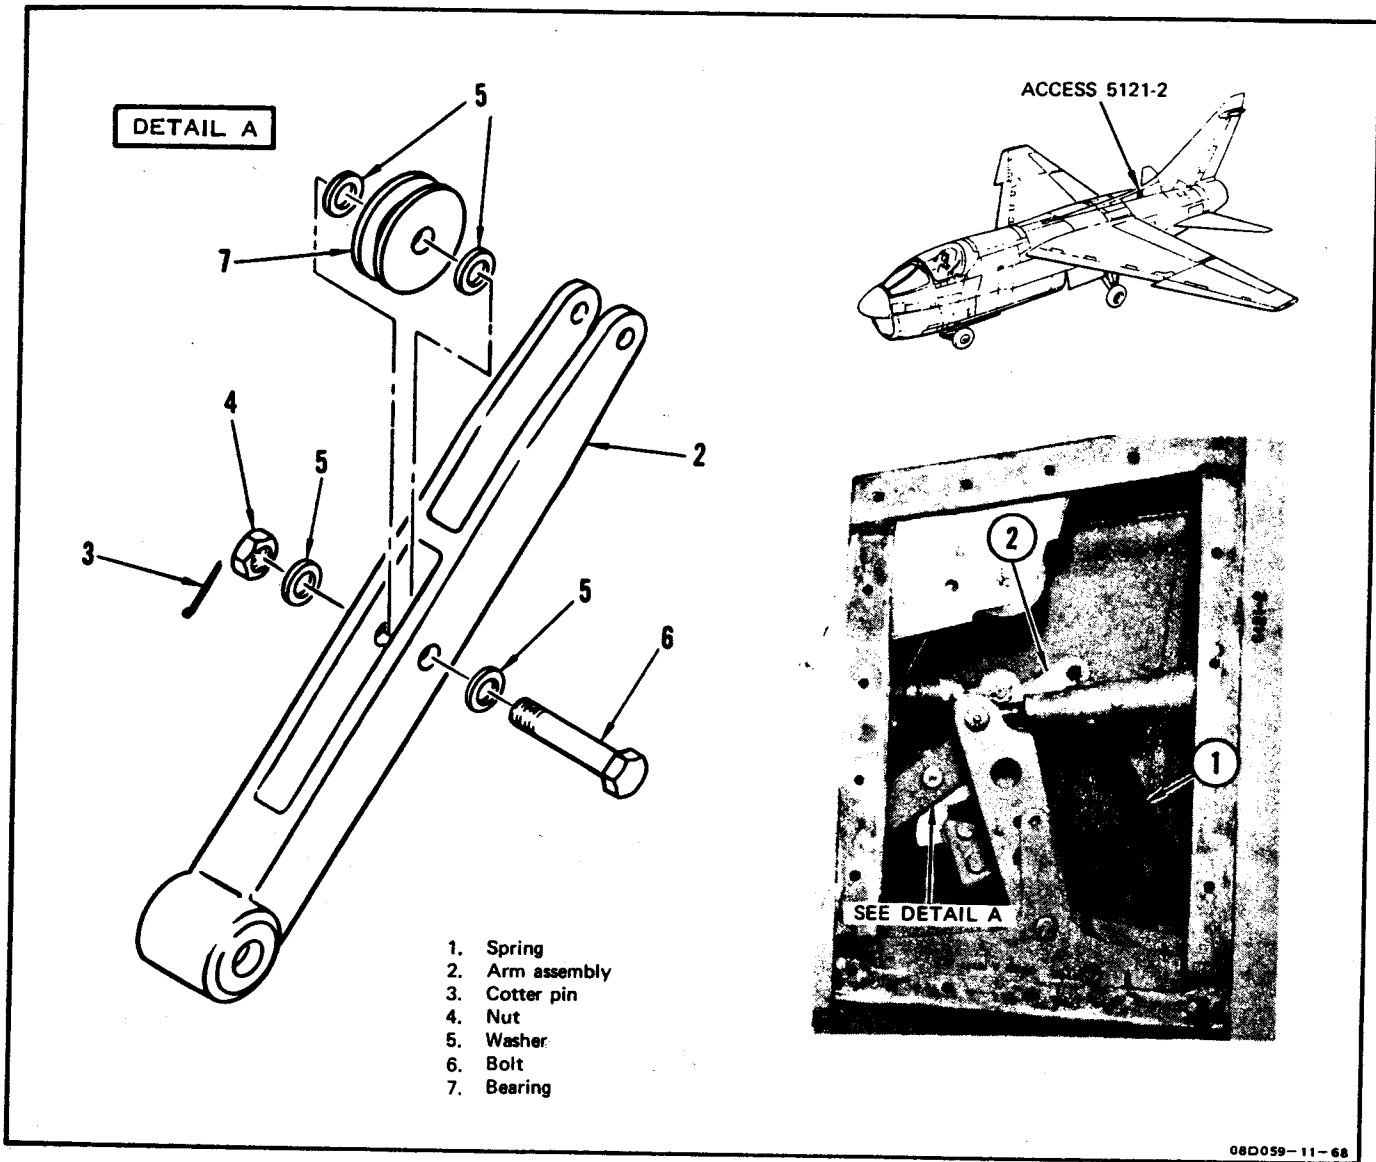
Aft Cam Mechanism Bearing Removal and Installation
